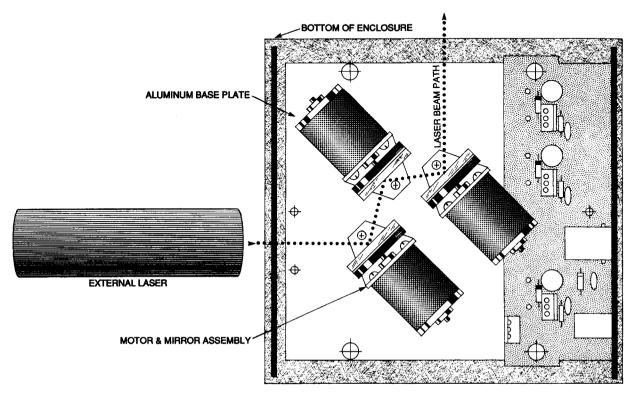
THE MOTOR ASSEMBLIES can pivot on the baseplate to allow for alignment of the laser beam.
